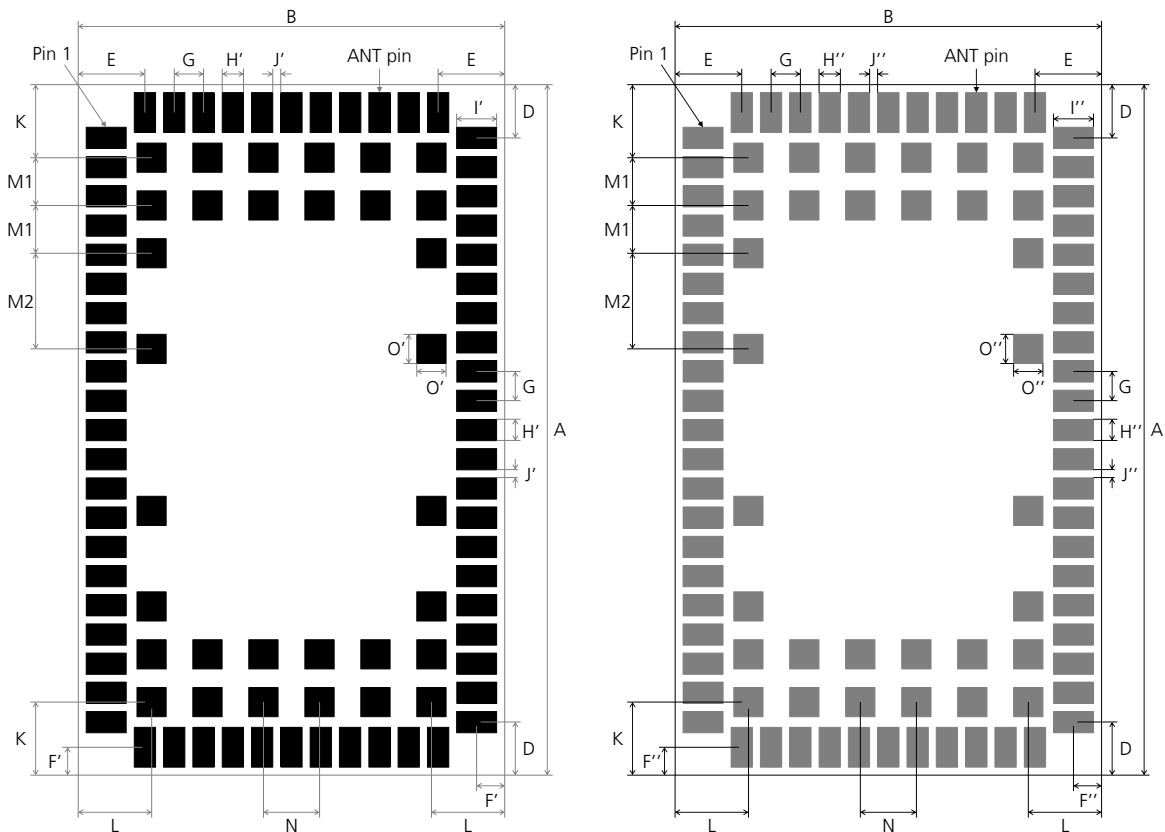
SARA-R4 series modules suggested footprint and paste mask (application board top view)
